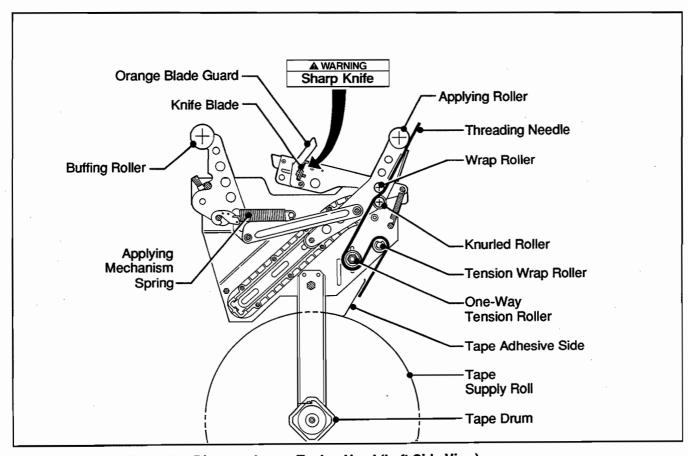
Tape Threading Diagram, Lower Taping Head (Left Side View)
